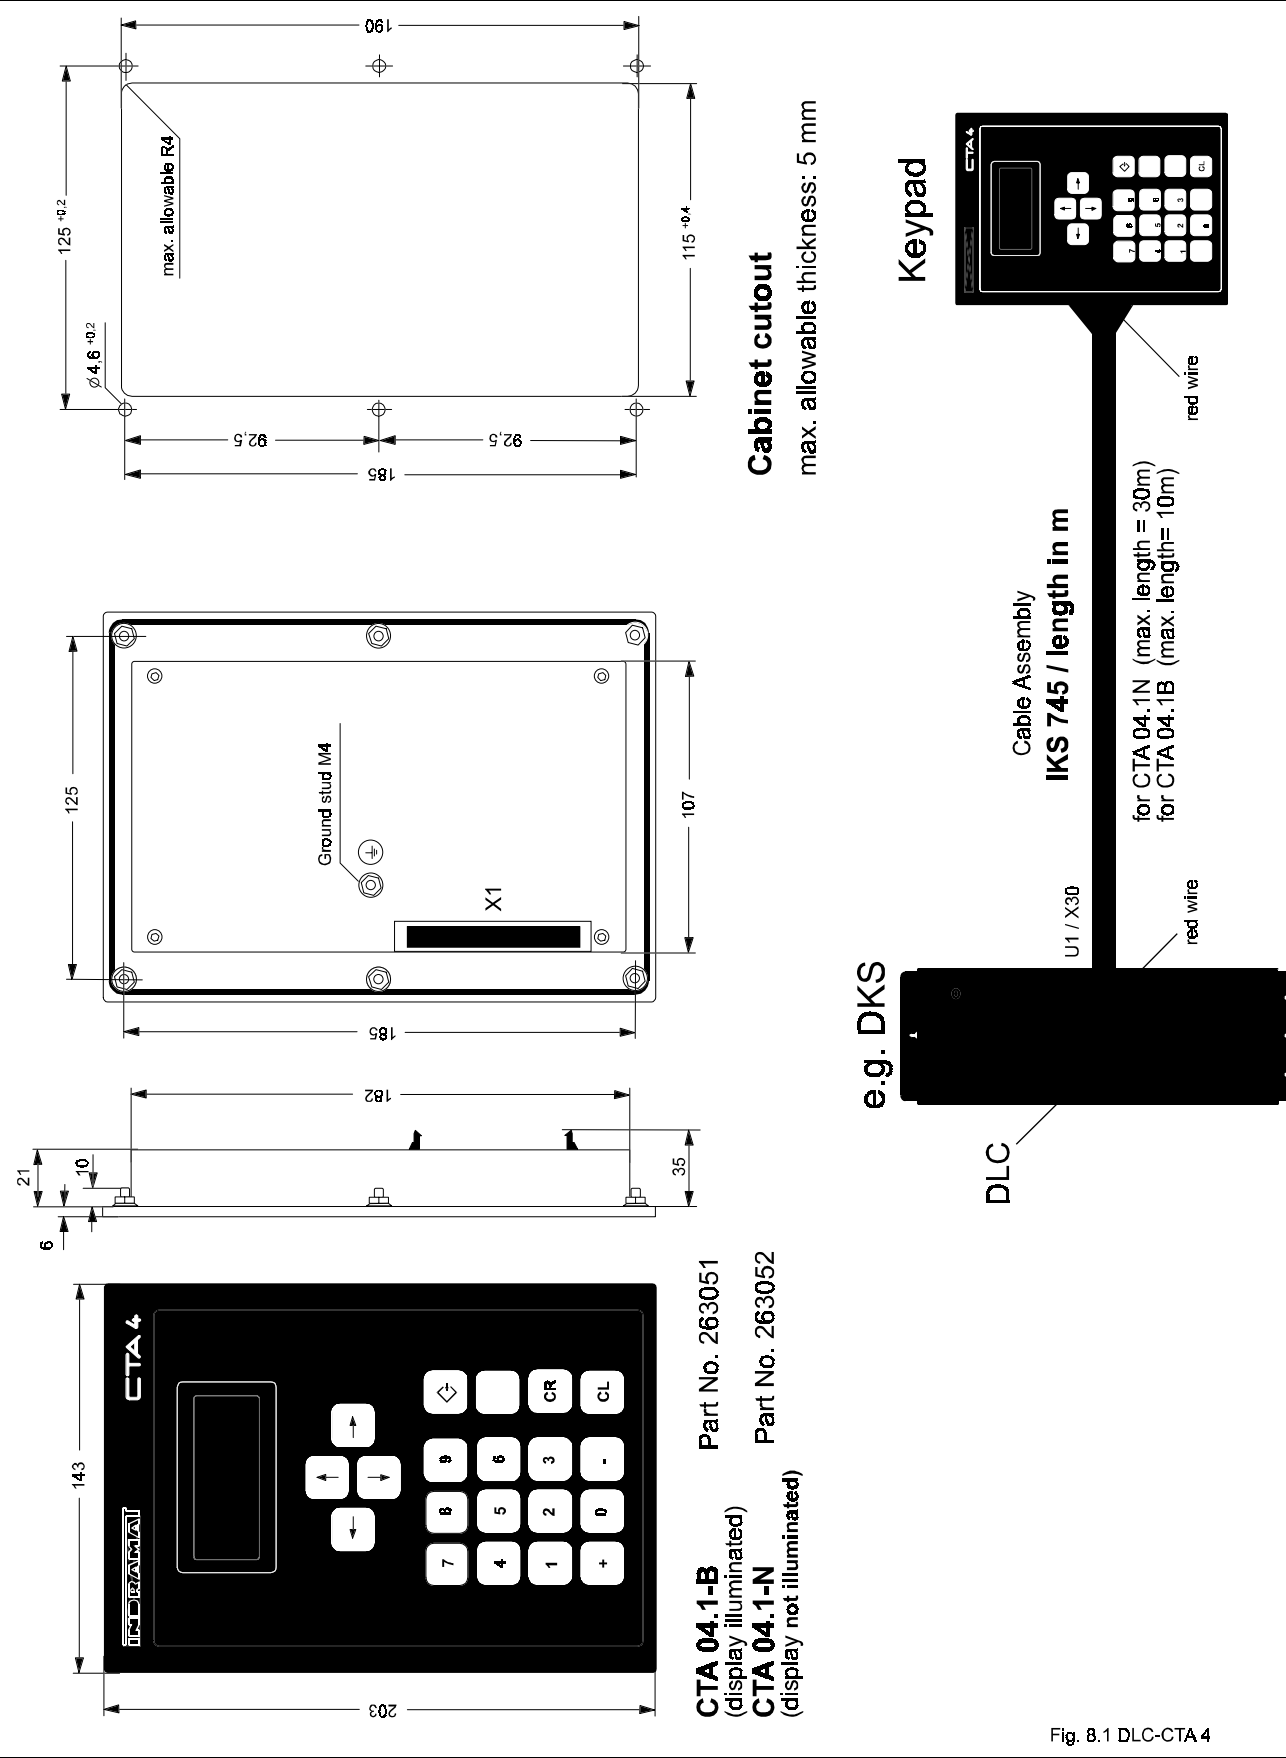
CTA 04 Keyboard and Cabinet Cutout Dimensions
